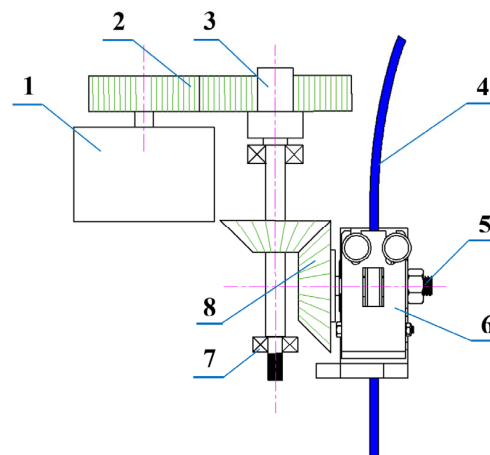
Schematic view of the transmission from the motor to the filament feeder. 1—Stepper motor; 2—Sun spur gears; 3—Planet spur gear; 4—Housing shaft; 5—Filament; 6—Knurled bolt; 7—Filament feeding mechanism; 8—Ball bearing; 9—Bevel gears.
